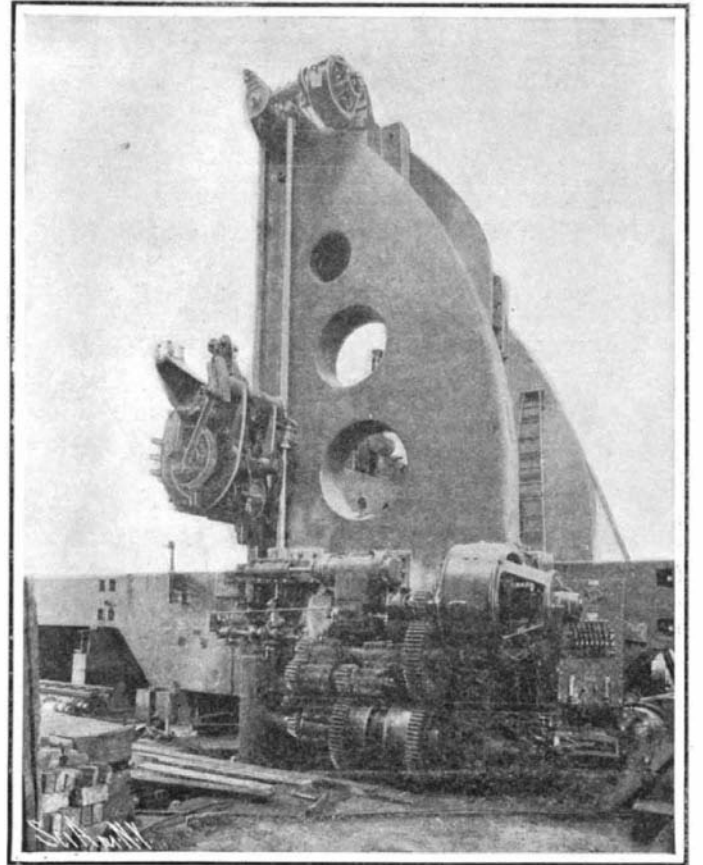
MAIN DRIVE BY 100-HORSE-POWER MOTOR THROUGH GEARING AND PNEUMATIC CLUTCHES.
